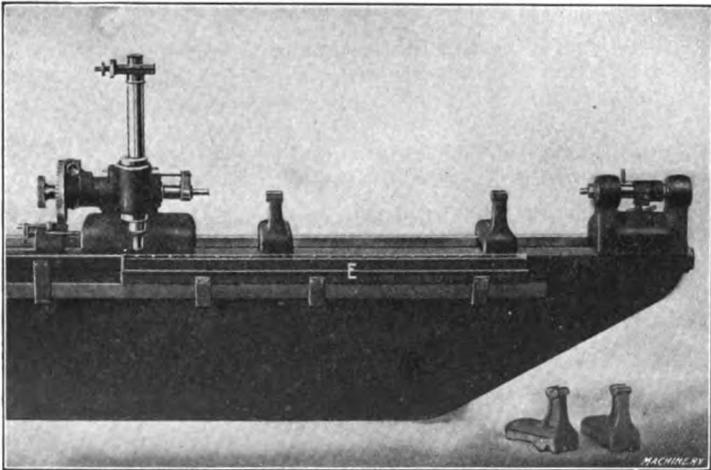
Rear View of Pratt & Whitney Measuring Machine
